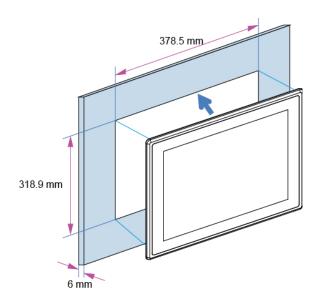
SPC-17xx Panel Mount Cut-out hole and maximum panel thickness
